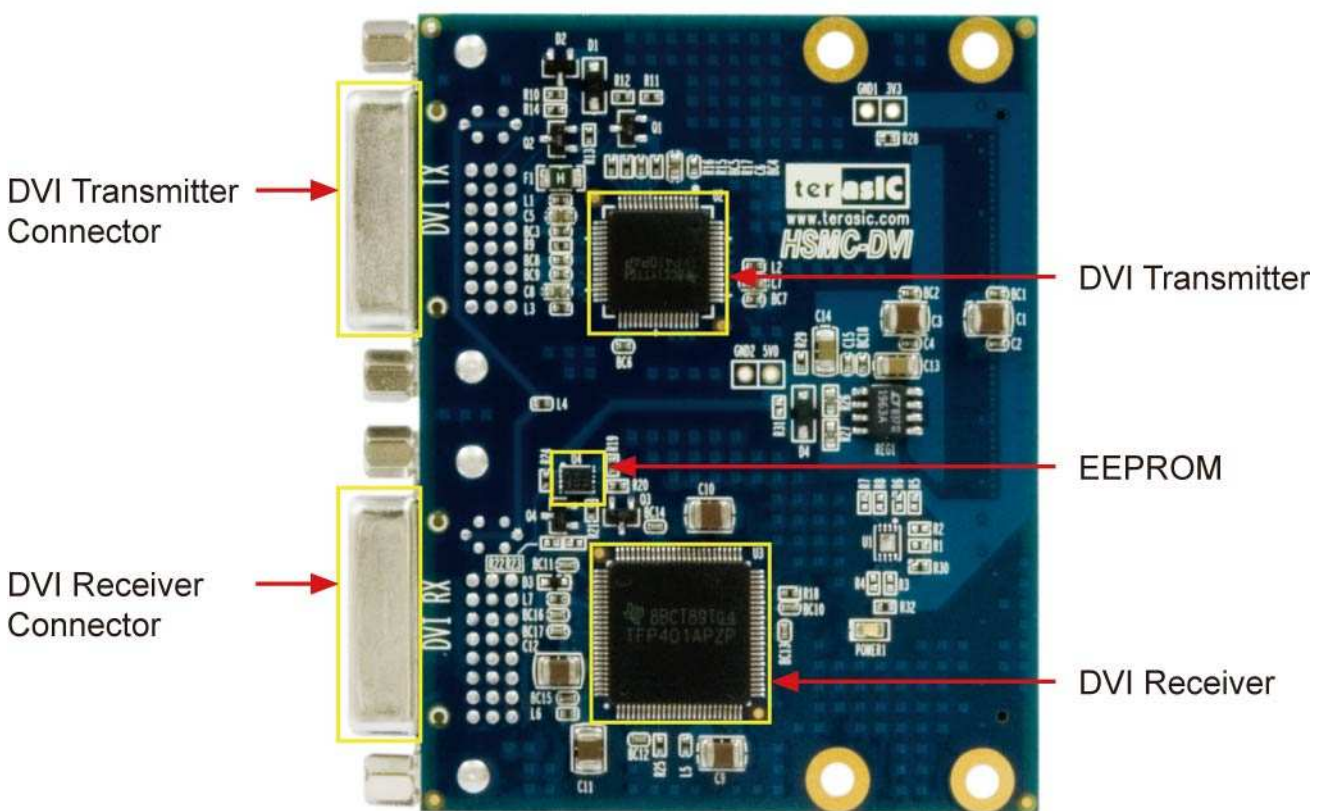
The HSMC-DVI PCB and component diagram
